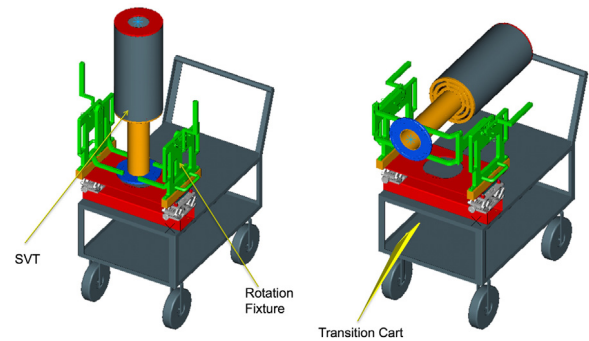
A computer model of the transition fixture. Left: the assembled barrel is transferred to the fixture. Right: the barrel is rotated, ready to be mounted on the support tube.
